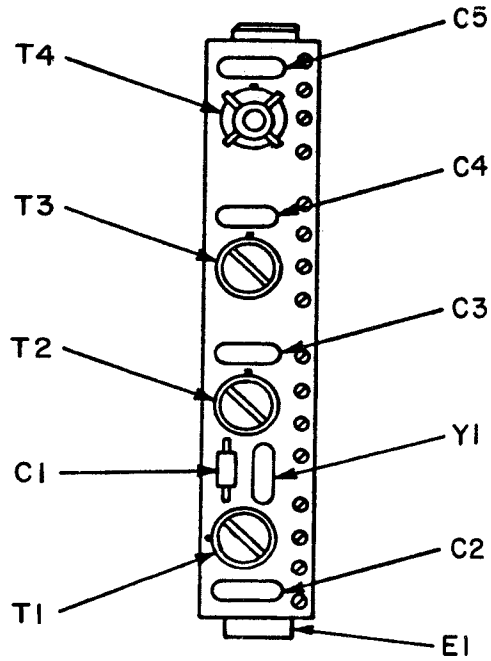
20 MHz Subassembly A2A4A10, Component Locations
